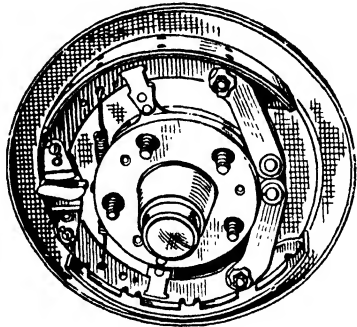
FRONT BRAKE OF THE 14 H.P. VAUXHALL (1938 MODEL) SHOWING HOW EACH SHOE IS CARRIED BY A RADIUS LINK AND OPERATED BY A CAM
